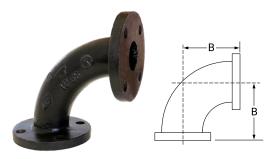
90° Reducing Flanged Elbow (Class 125 Standard)
